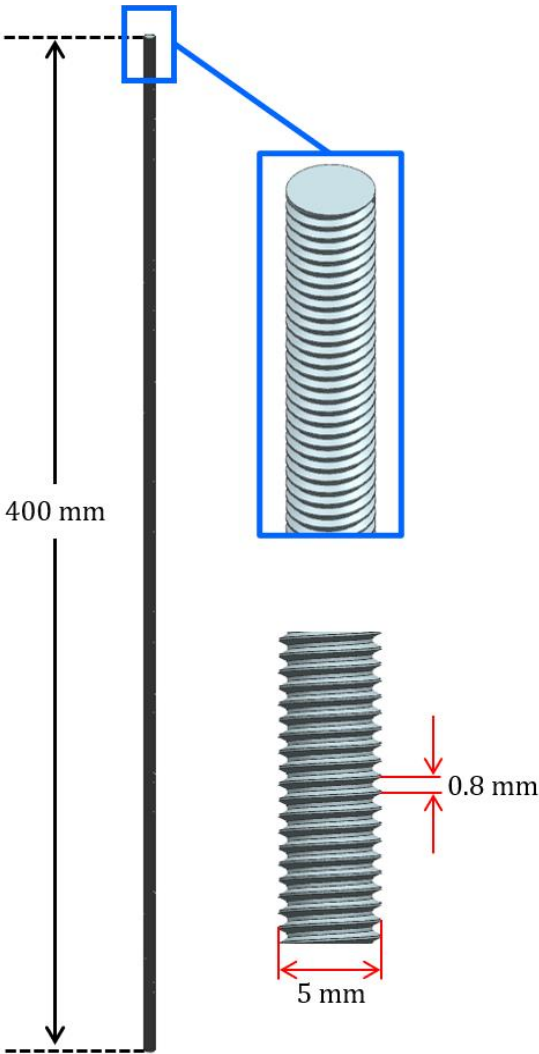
Dimensions for a single spike assembly of a G-spike electrode (a) on the electrode shaft and (b) without the electrode shaft
